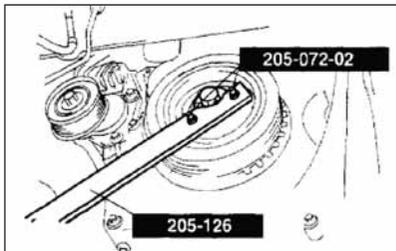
Tighten the crankshaft pulley lock bolt on 2.0L and 2.3L Mazda engines.
